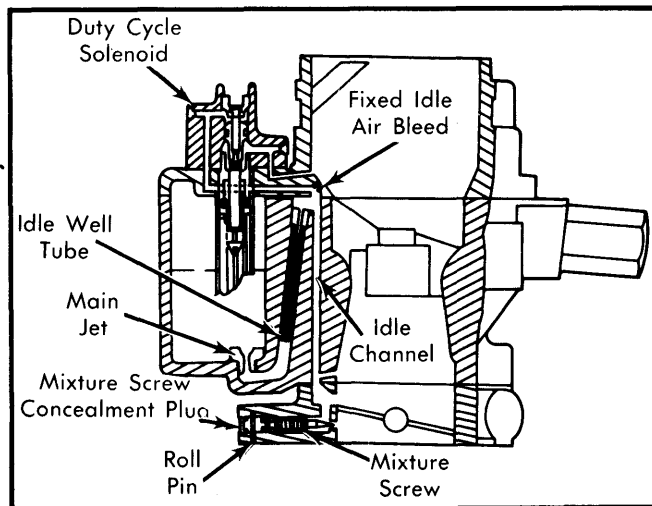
Sectional View of Holley 6145 Feedback Carburetor Showing Location of Duty Cycle Solenoid
